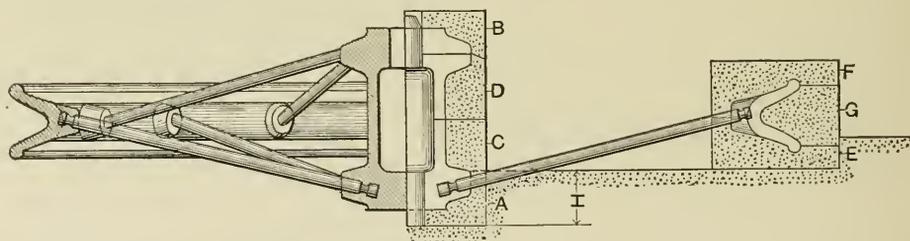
Half Section of Rope Sheave and Half Section of Mold
